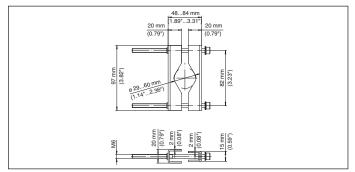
Dimensions Brackets for tube mounting VEGAMET 861, 862
